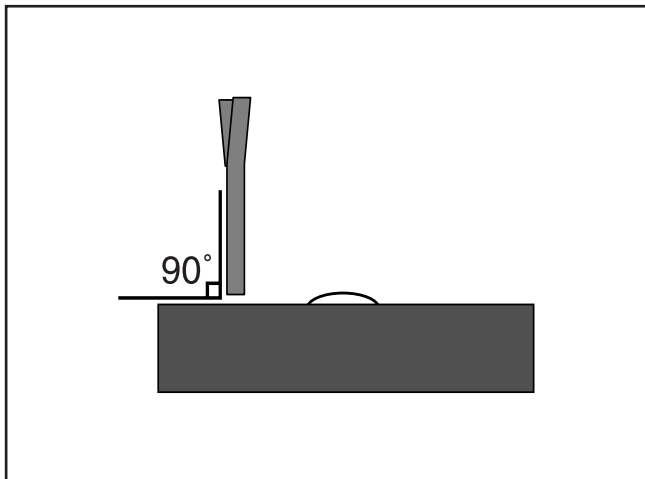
Illustration of blade set perpendicular (90°) to the support bearing face.
